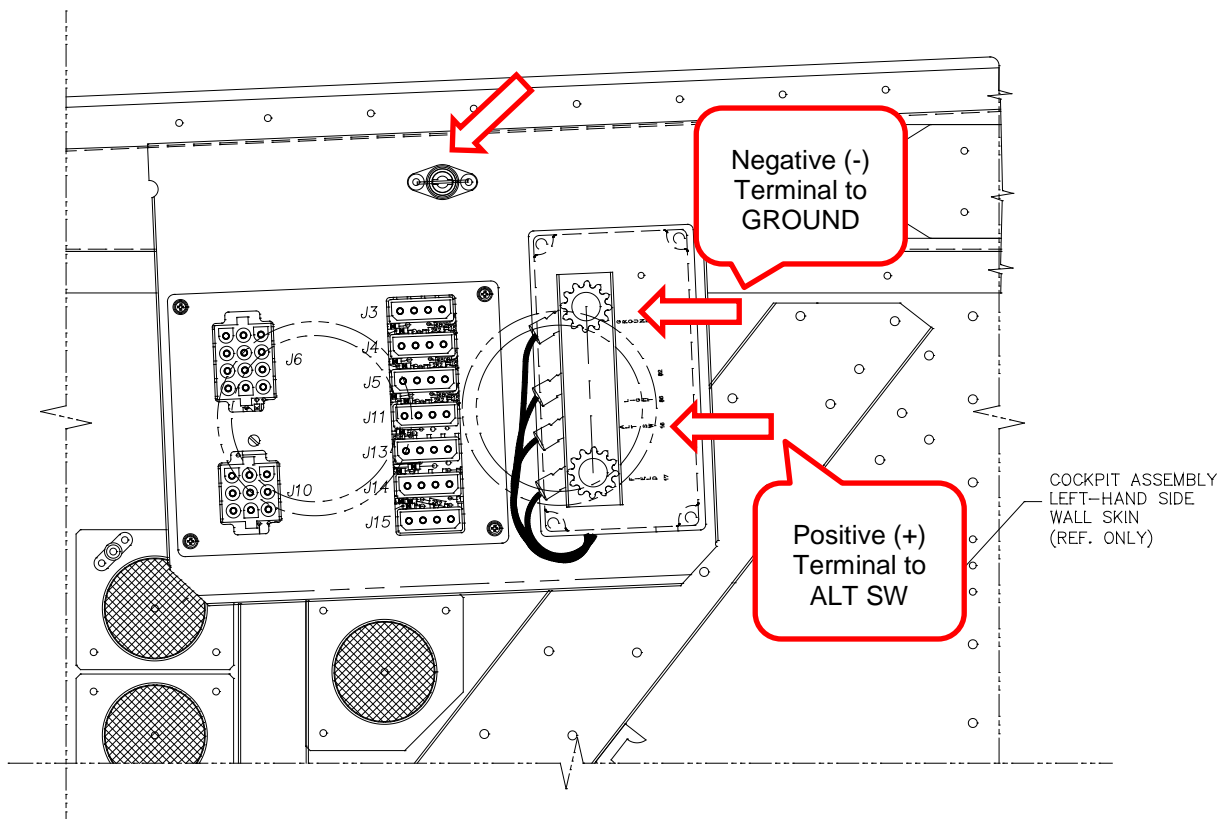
View looking directly at the Caution Tray Assembly. Aircraft wiring not shown.
